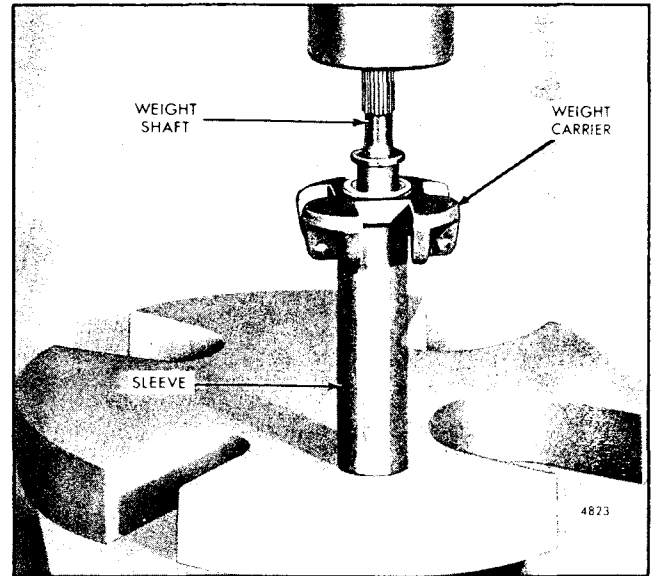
Installing Governor Weight Shaft in Weight Carrier
